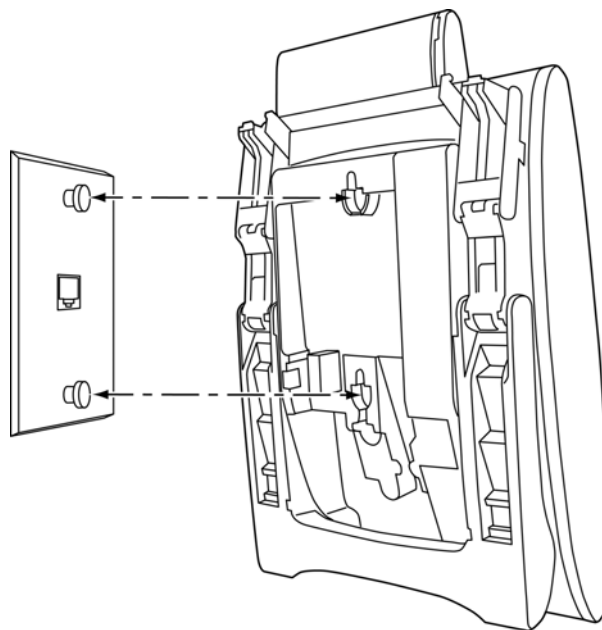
Mount Multiline Terminal Wall on Wall Plate
